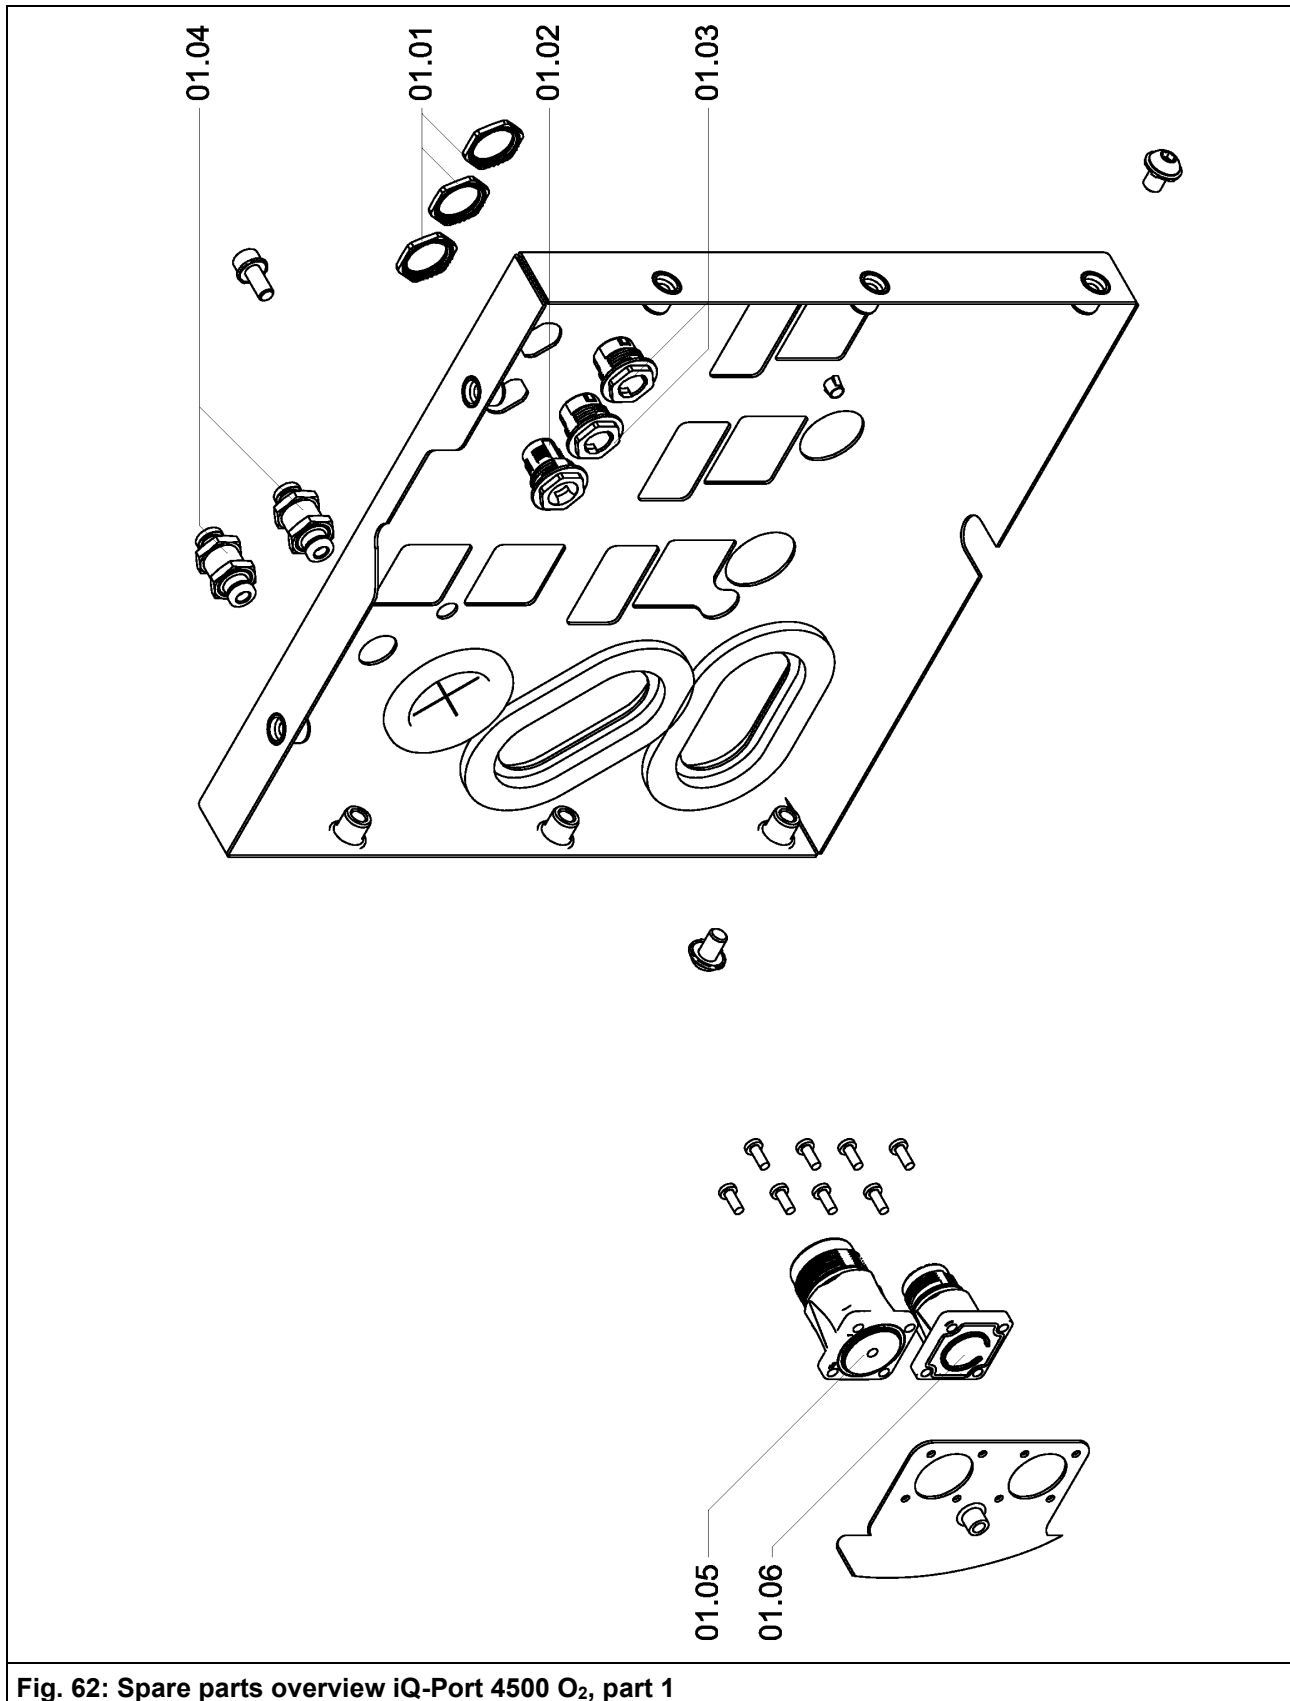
Spare parts overview iQ-Port 4500 O₂, part 1
